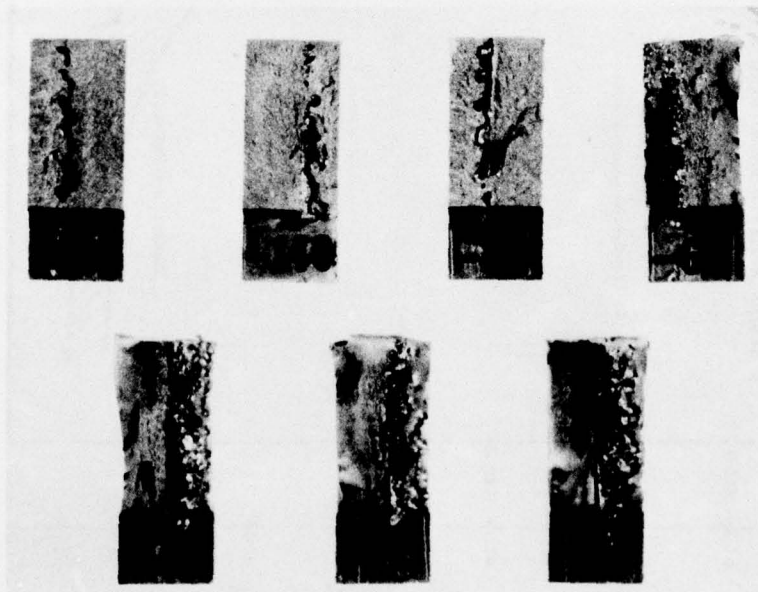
Fracture surfaces of weld specimens containing linear porosity (tested at the temperatures indicated [$^{\circ}\text{C}$]). (All fractures are through the weld metal.)
